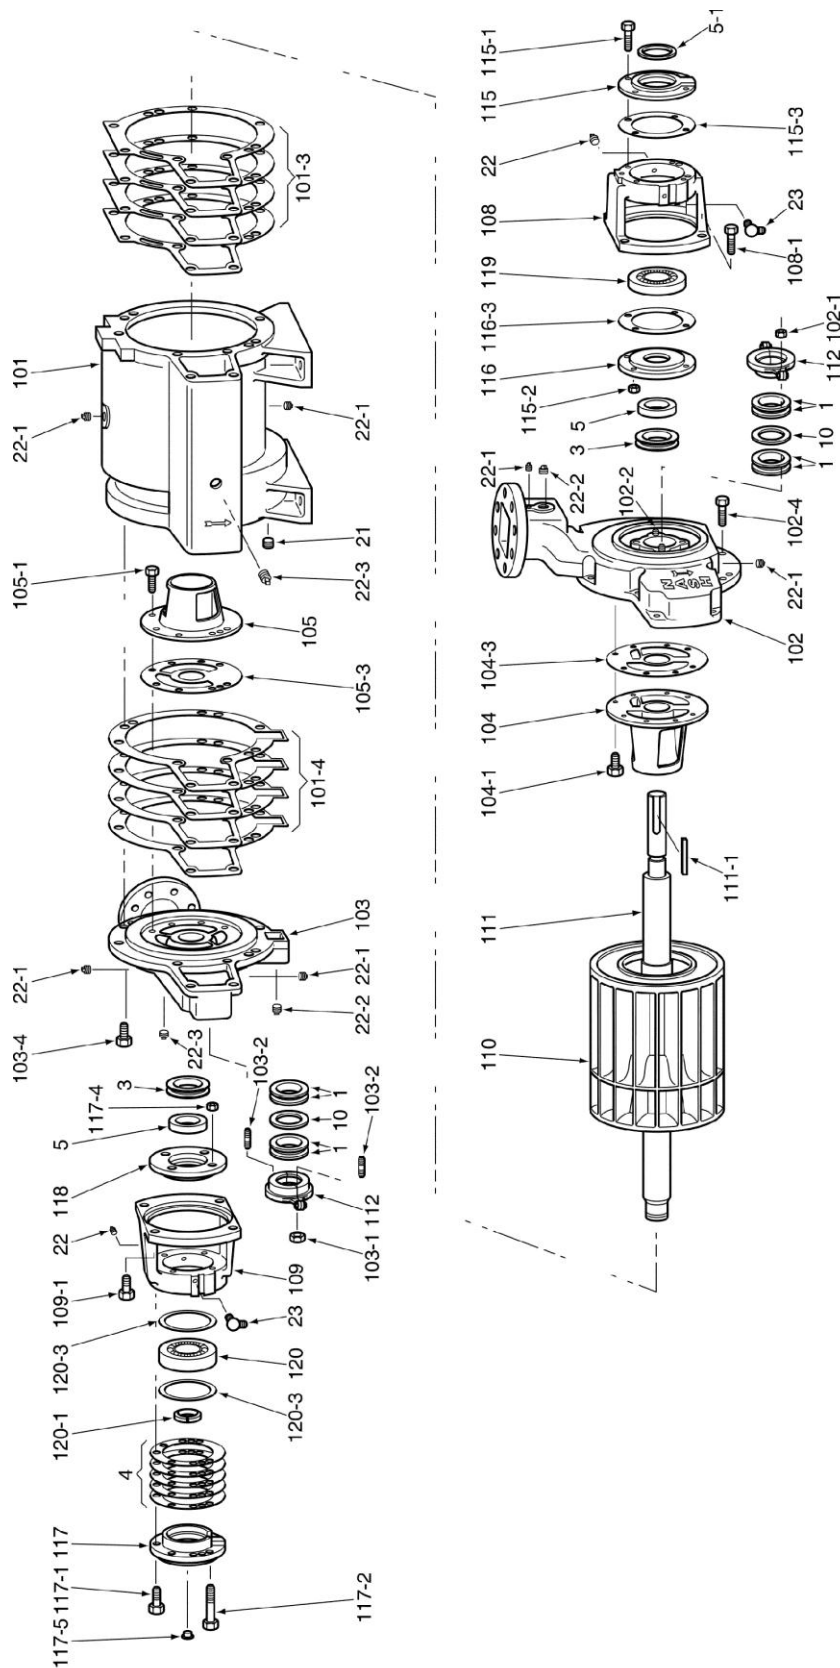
Exploded view of TC-7 (delivered version may differ)
